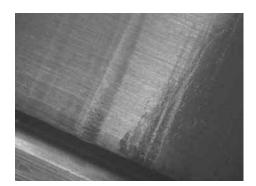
This inner ring of a spherical roller bearing shows roller impact damage from shock loading.
